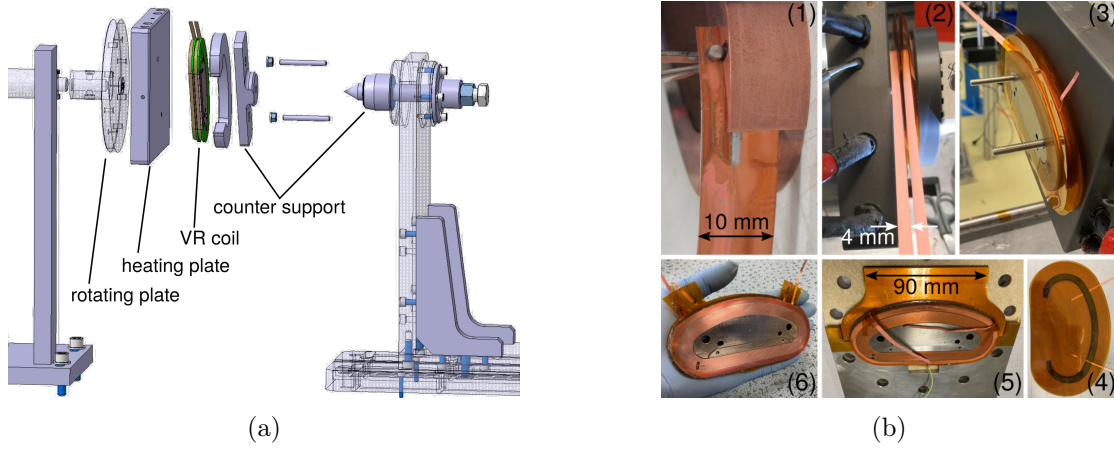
(a) VR coil winding sketch without two tape spools, motors, and clutches. (b) Winding collage of different steps clockwise: (1) A pin fixes the tape to the copper body, (2) two *ReBCO* tapes are wound at once for the VR coil, (3) VR coil on the winding bench and visible voltage taps, (4) center insulation with included voltage taps, (5) VR coil and its copper current lead placement. (6) VR coil after winding. Pictures reproduced and adapted from [113]
